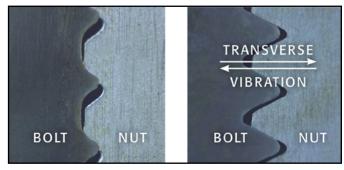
The Huck 360's (left) thread flanks are locked, so the nut cannot move relative to the bolt. With a conventional thread (right), the thread flanks can slide under transverse vibration, and the nut can move relative to the bolt.
